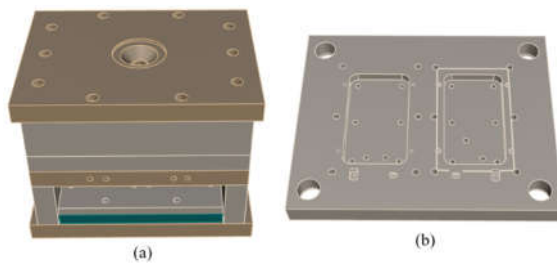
A typical injection mold, (a) the mold base, and (b) part of the mold base.
